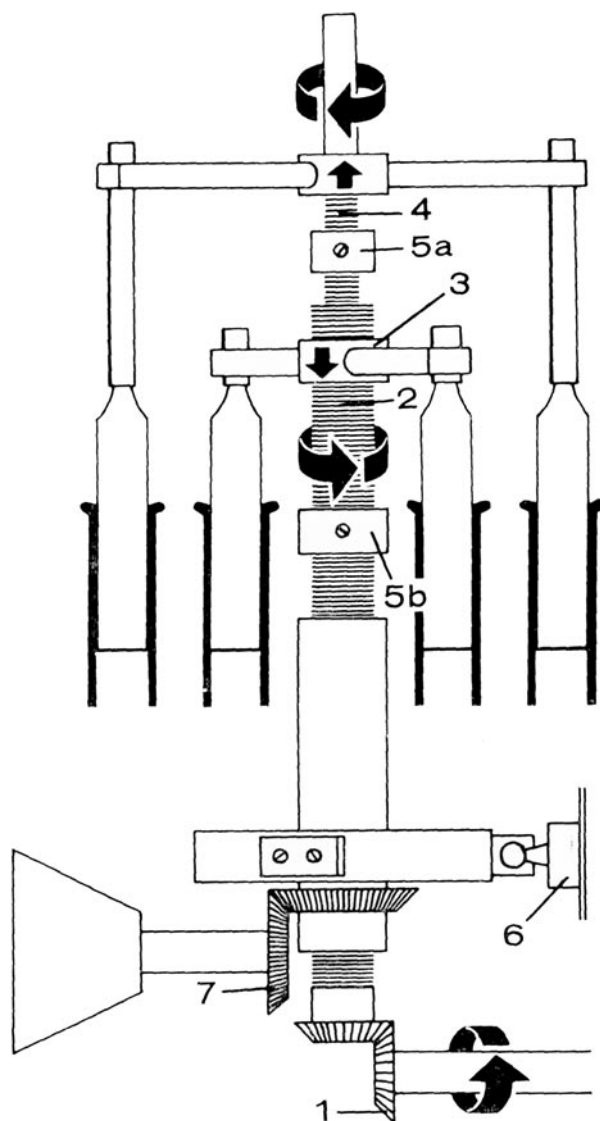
Schematic view of the pump's mechanical construction. 1 gear, 2 rotating tube, 3 threaded block, 4 rod that screws into tube 2, 5 adjustable stop nuts, 6 switch for reversing the motordirection, 7 mitre gear.
